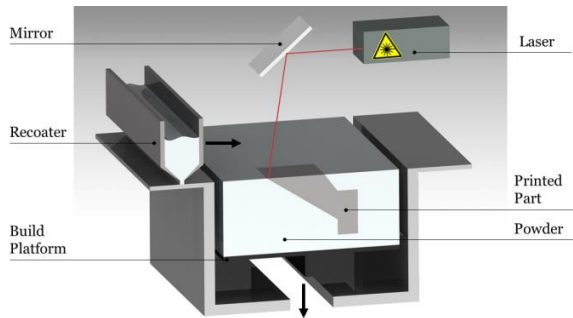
Graphic representation of a Selective Laser Sintering machine, showing all key components.
